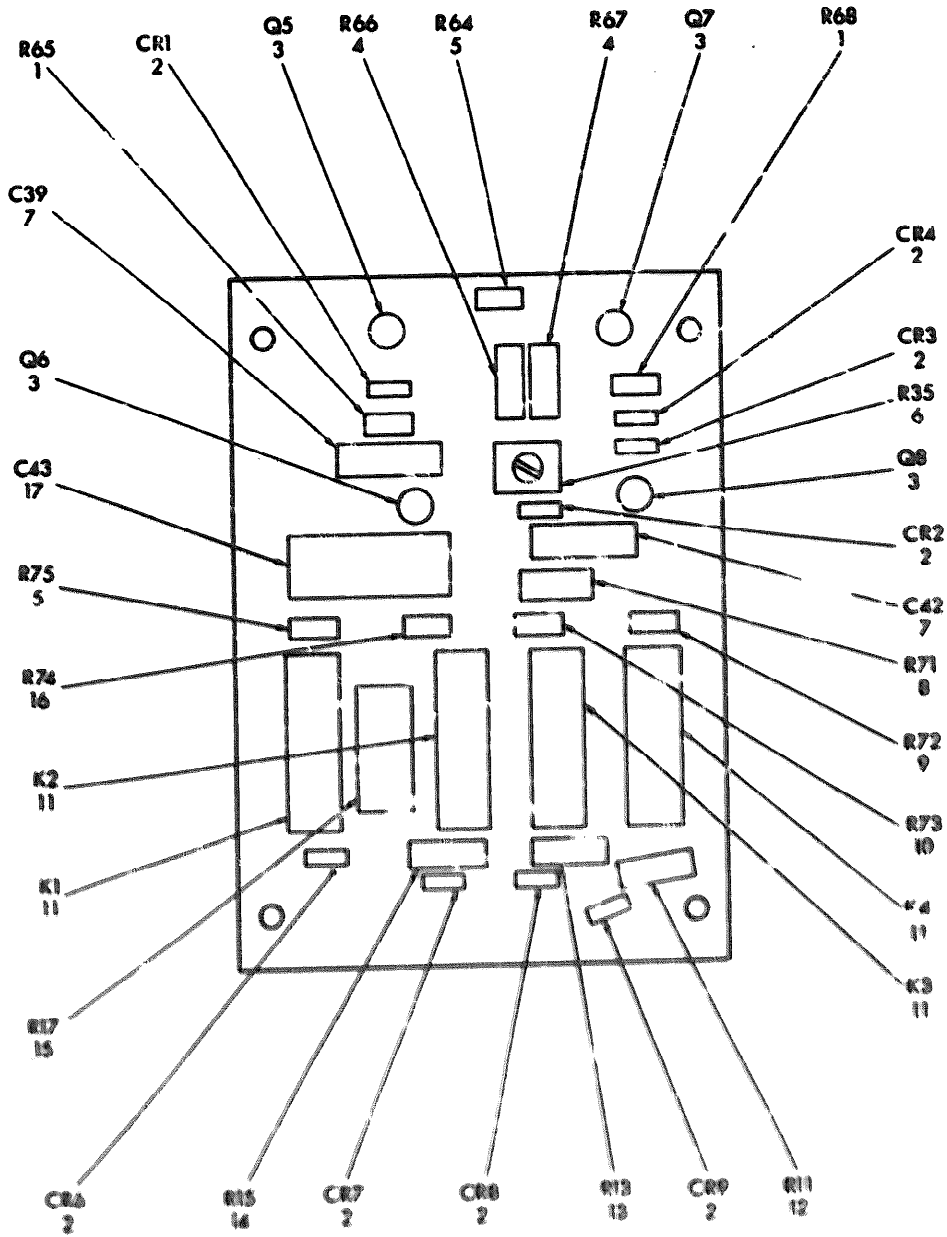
CIRCUIT CARD ASSEMBLY /A1A4
